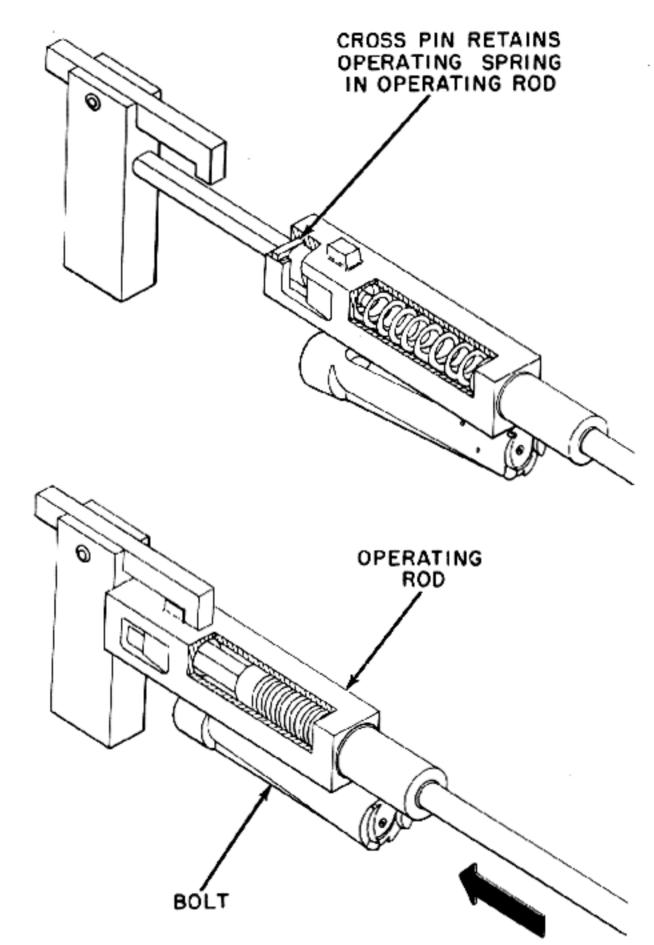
Captive Spring Used To Return Breech Bolt and Operating Rod.
